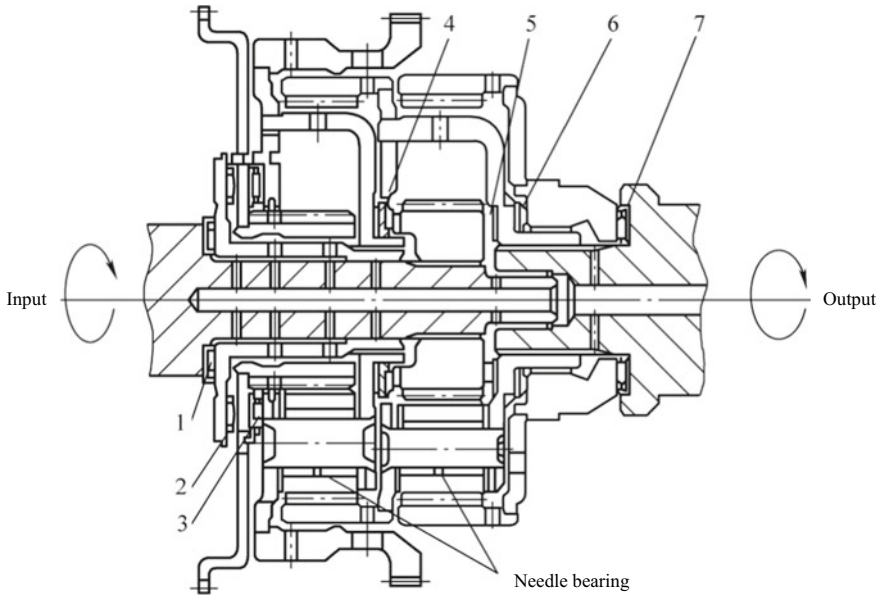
Installation positions of the bearings in the planetary gear train for test. 1–7—bearing
